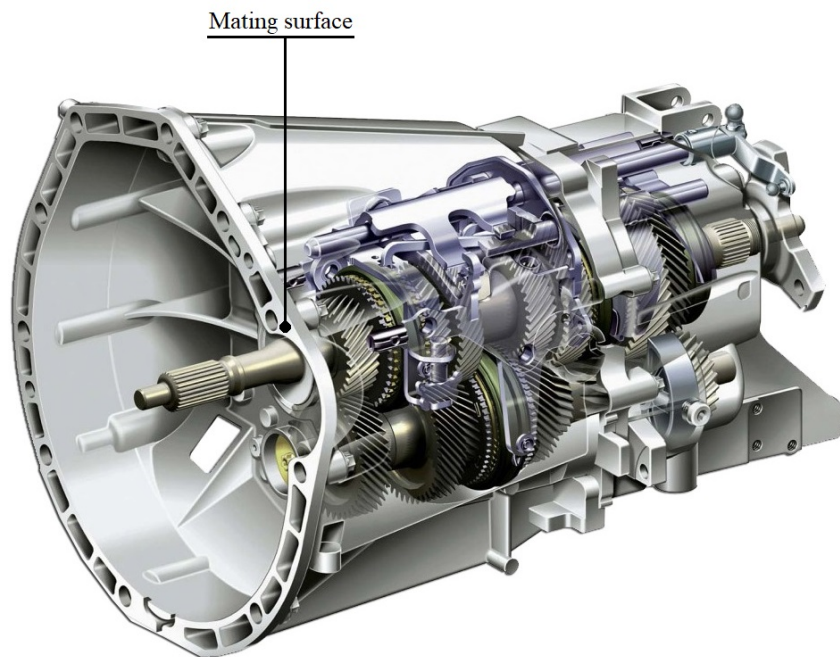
Gearbox housing, mating surface marks potential crevices, figure adapted from [5]
